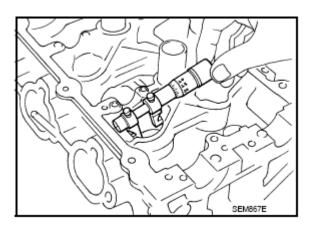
Measuring Inner Diameter Of Cylinder Head Valve Lifter Hole Using Inside Micrometer Courtesy of NISSAN NORTH AMERICA, INC.
